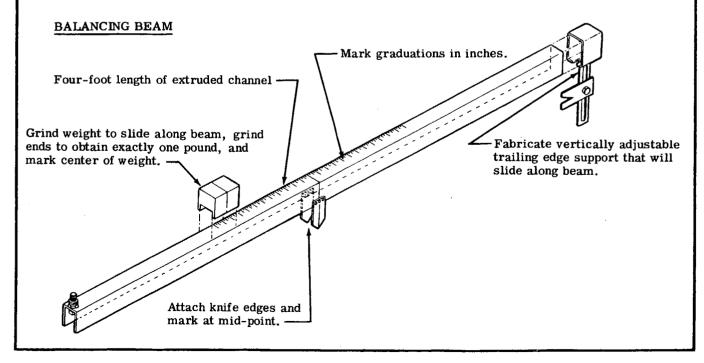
Control Surface Balancing (Sheet 1 of 4)
